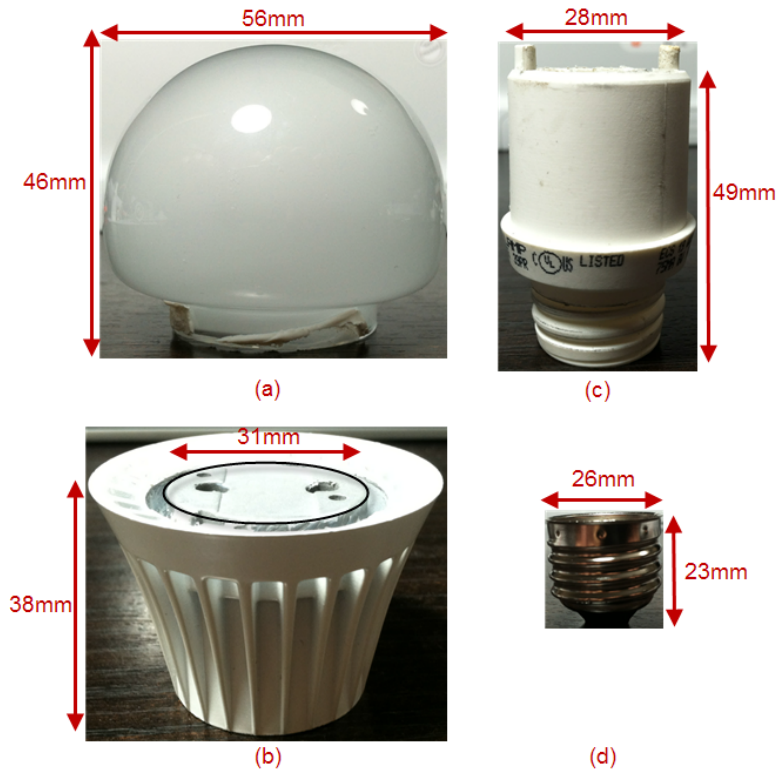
DC Light Bulb Enclosure Dimensions, (a) Light Diffuser, (b) Aluminum Heatsink, (c) Inner Sleeve for Electronics, (d) E26 Screw Base.
